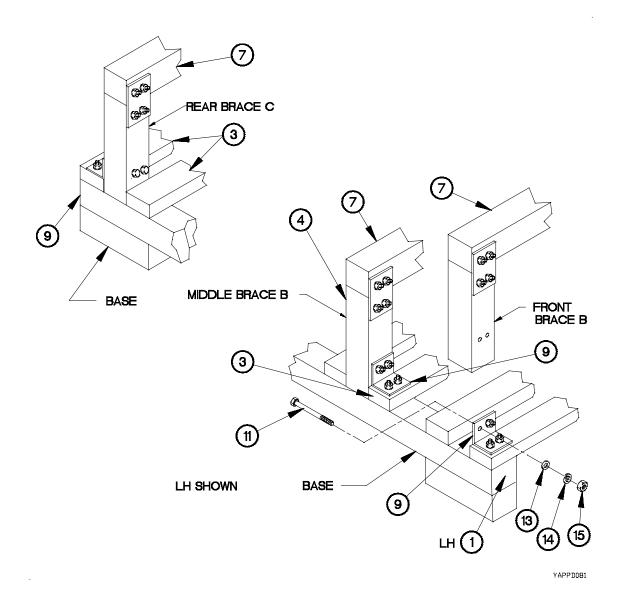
Cab Maintenance Stand Brace to Base Assembly
